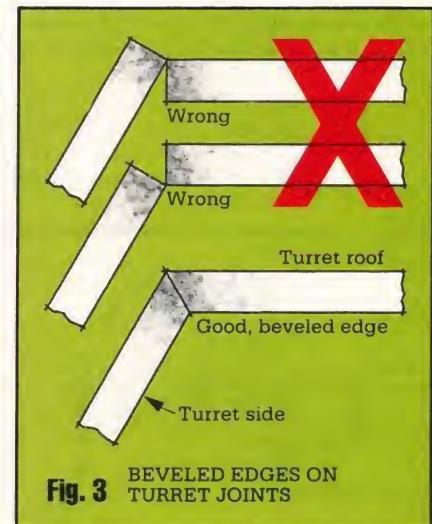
BEVELED EDGES ON TURRET JOINTS
